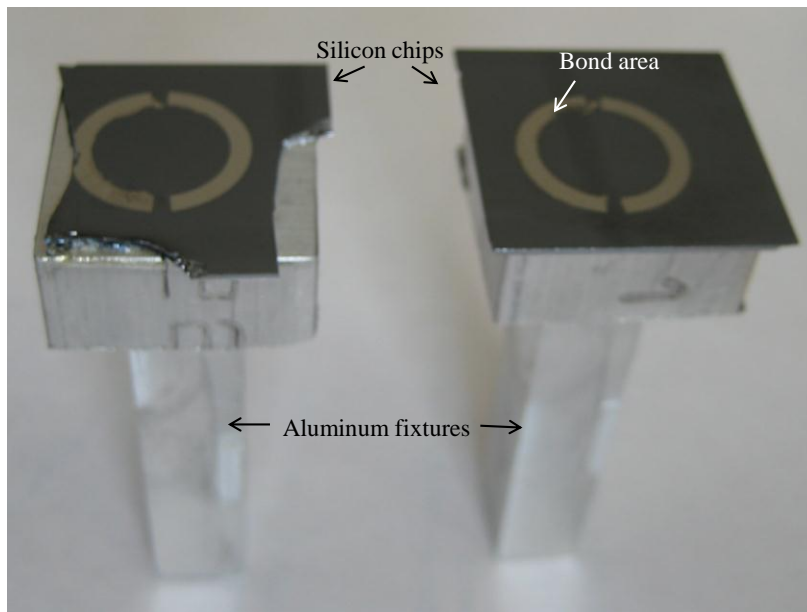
Picture of un-bonded chips and fixtures after testing.
